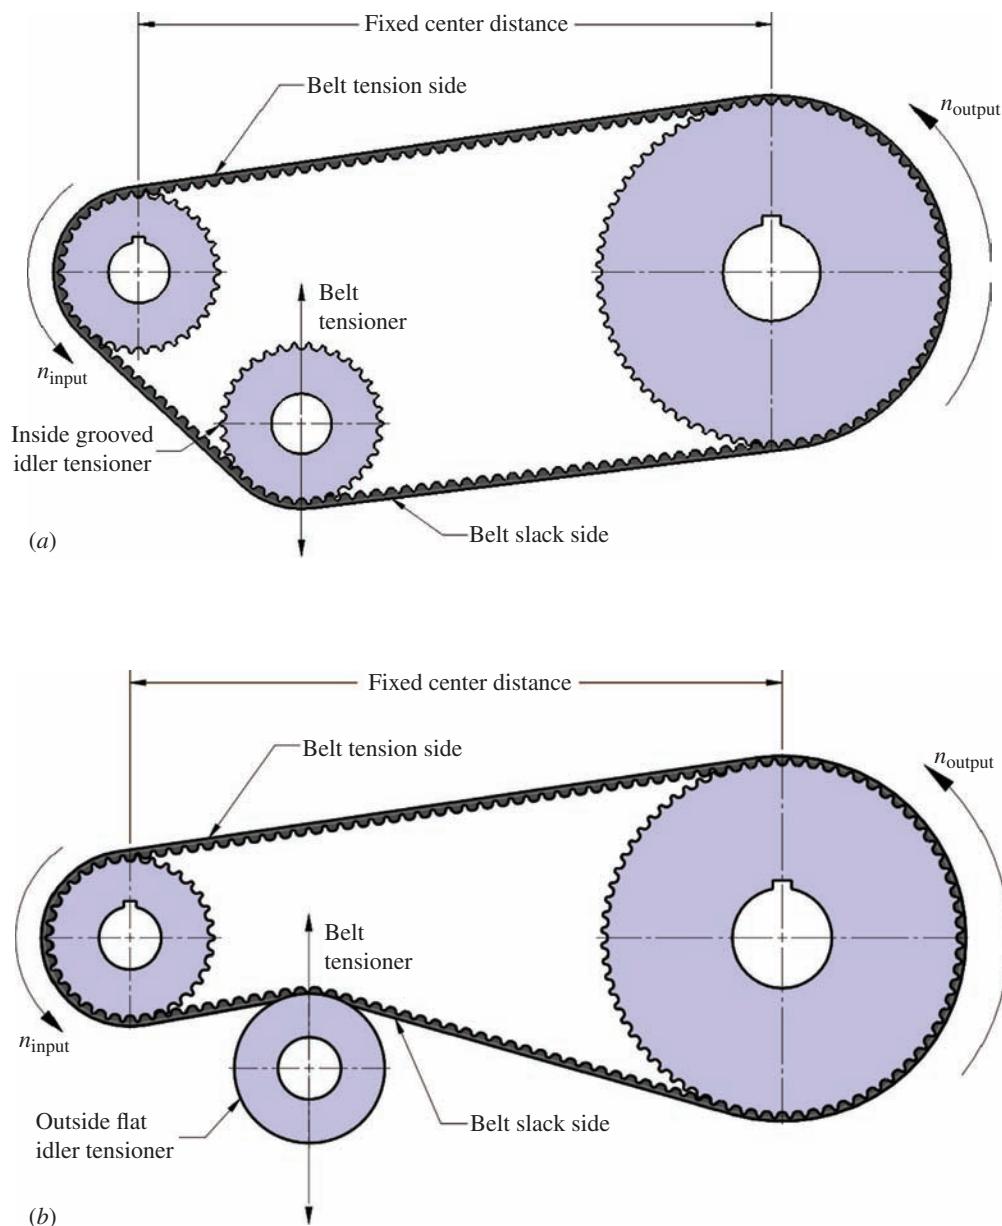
Belt drives with fixed center distances and added tensioners. (a) Inside grooved-idler tensioner. (b) Outside flat-idler tensioner
